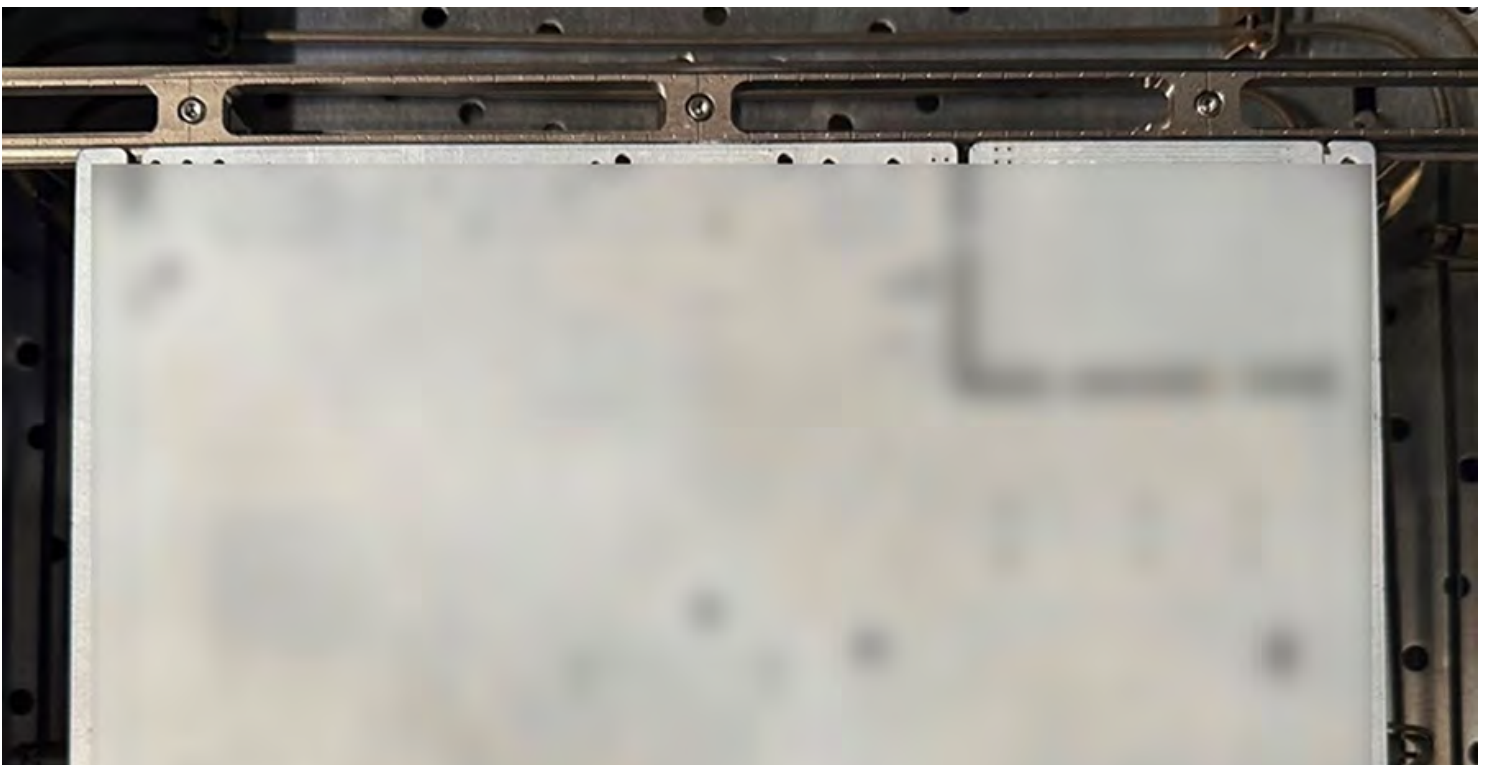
PCB sample test setup in oven (blurred to protect manufacturer).
